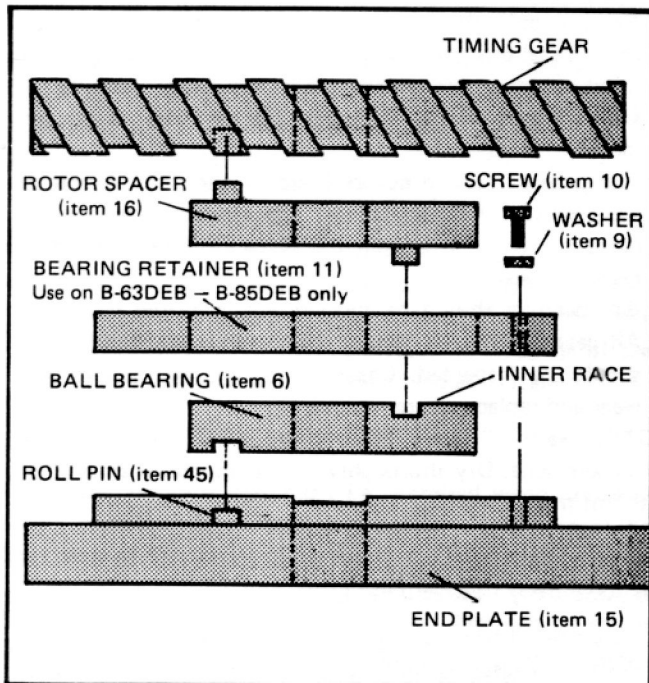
End Plate, Bearing, Spacer, Retainer and Timing Gear Alignment Detail
